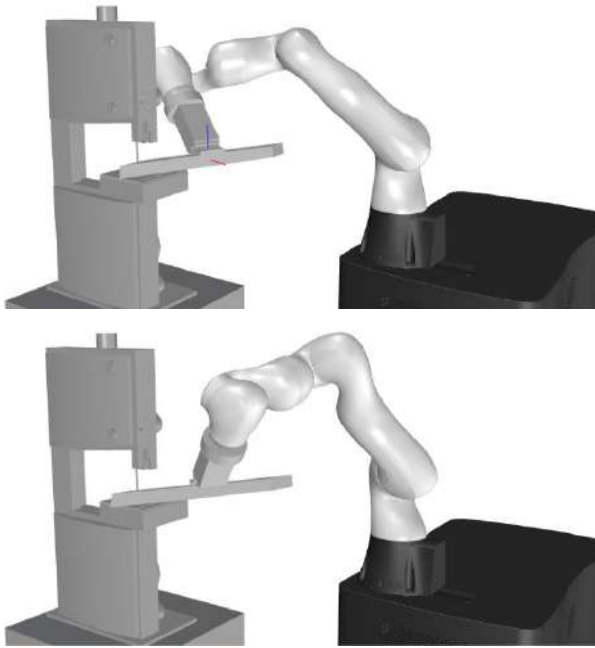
Optimizing the workpiece position to the robot and machine workspace
